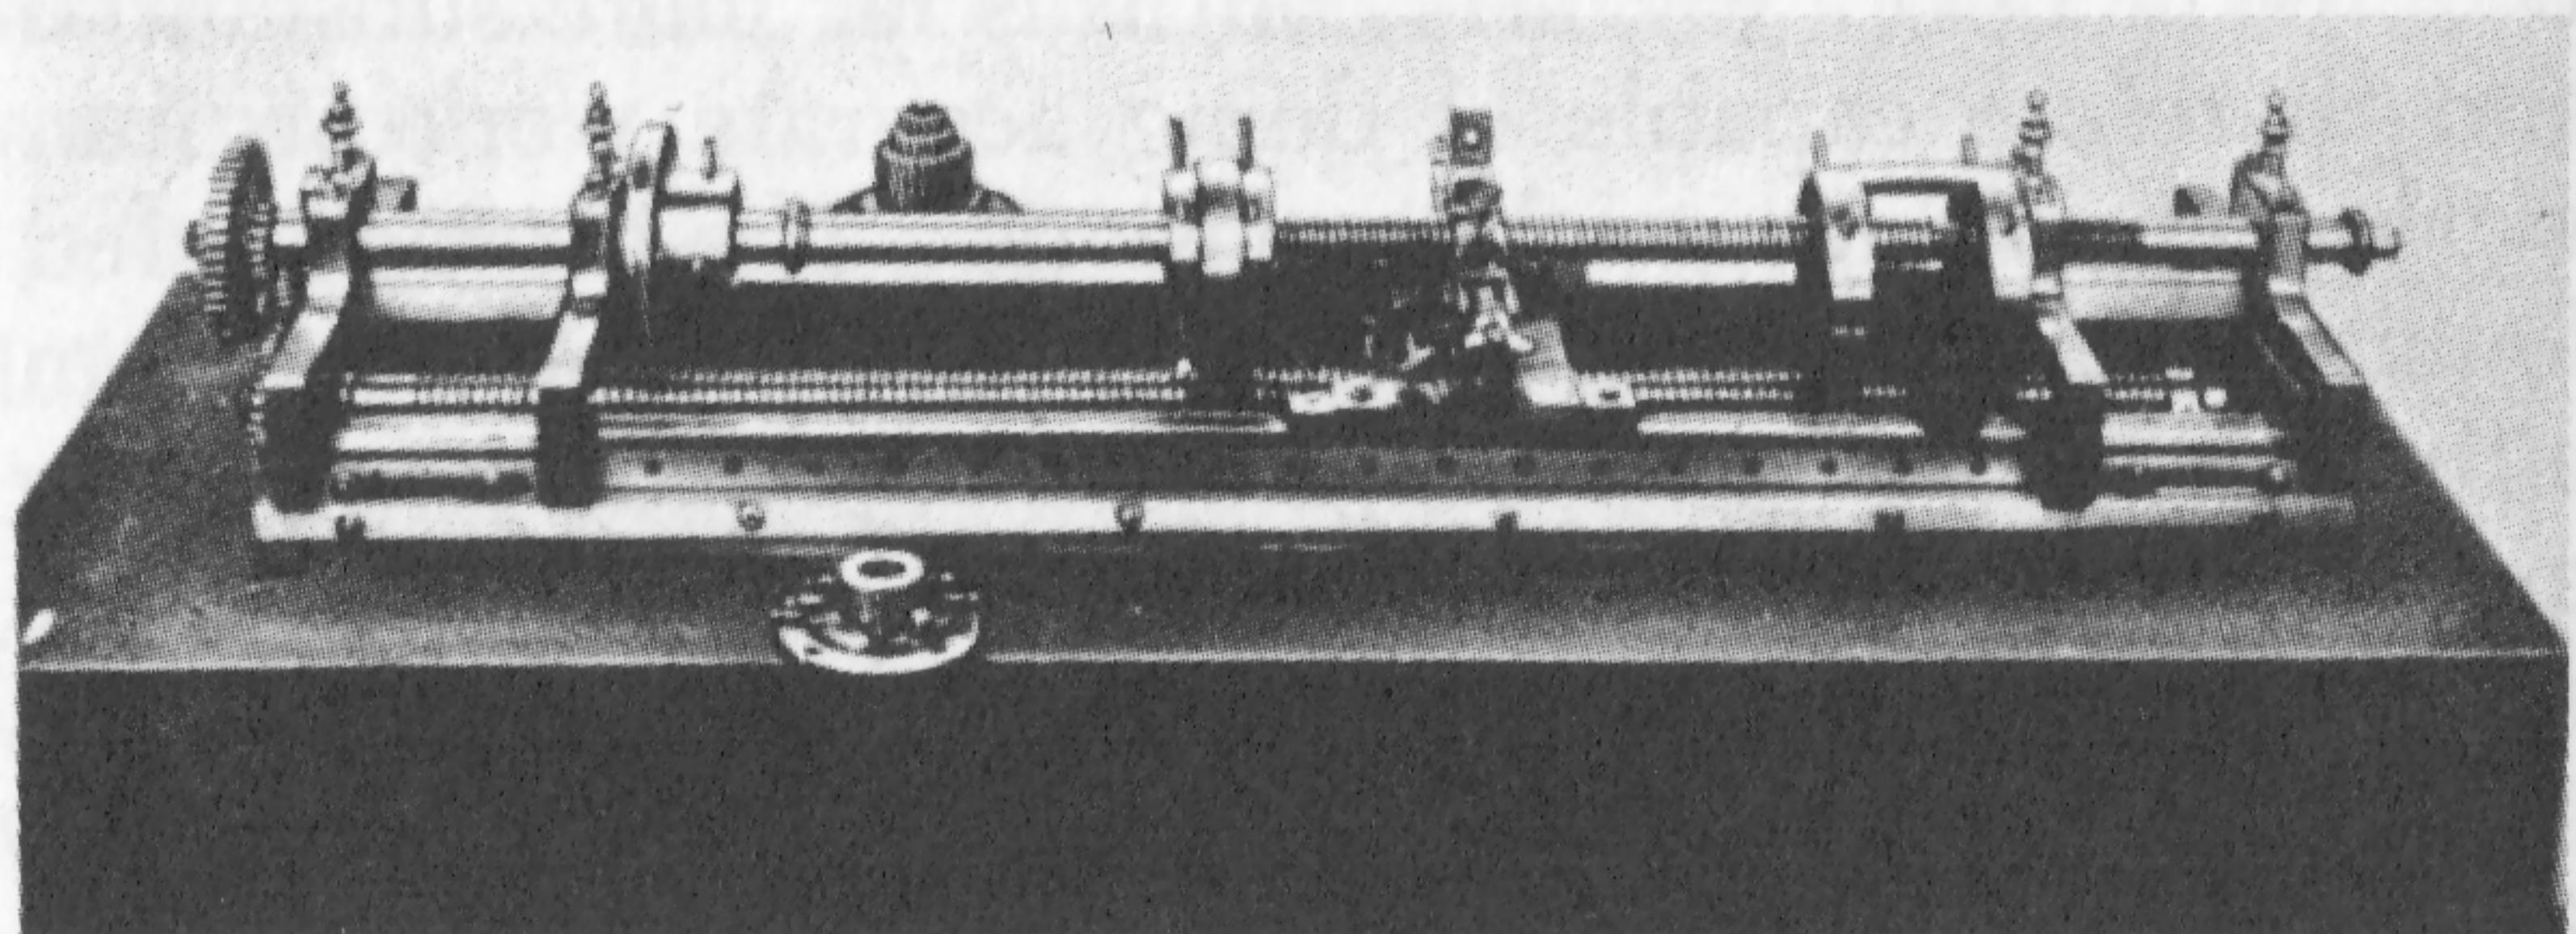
SCREW-CUTTING LATHE OF SENOT, 1795.
